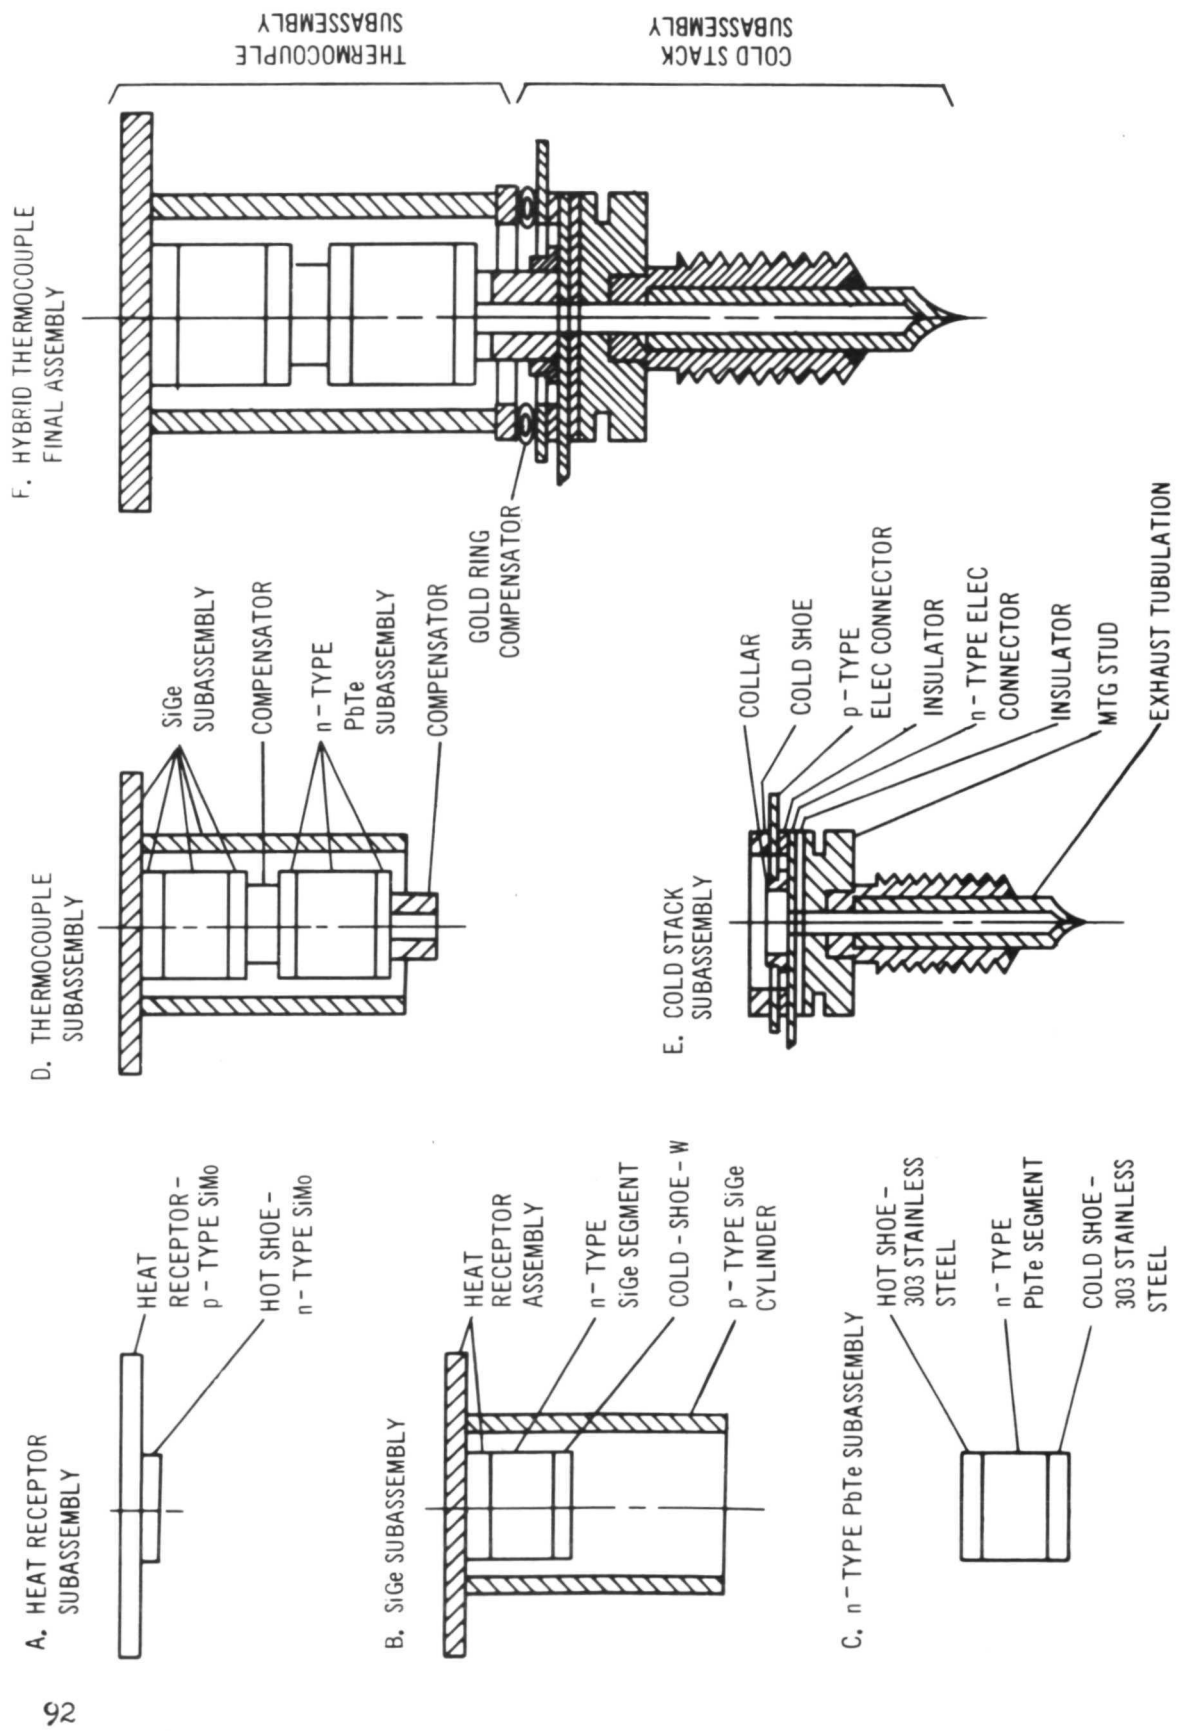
Hybrid Thermocouple Assembly Sequence - A
